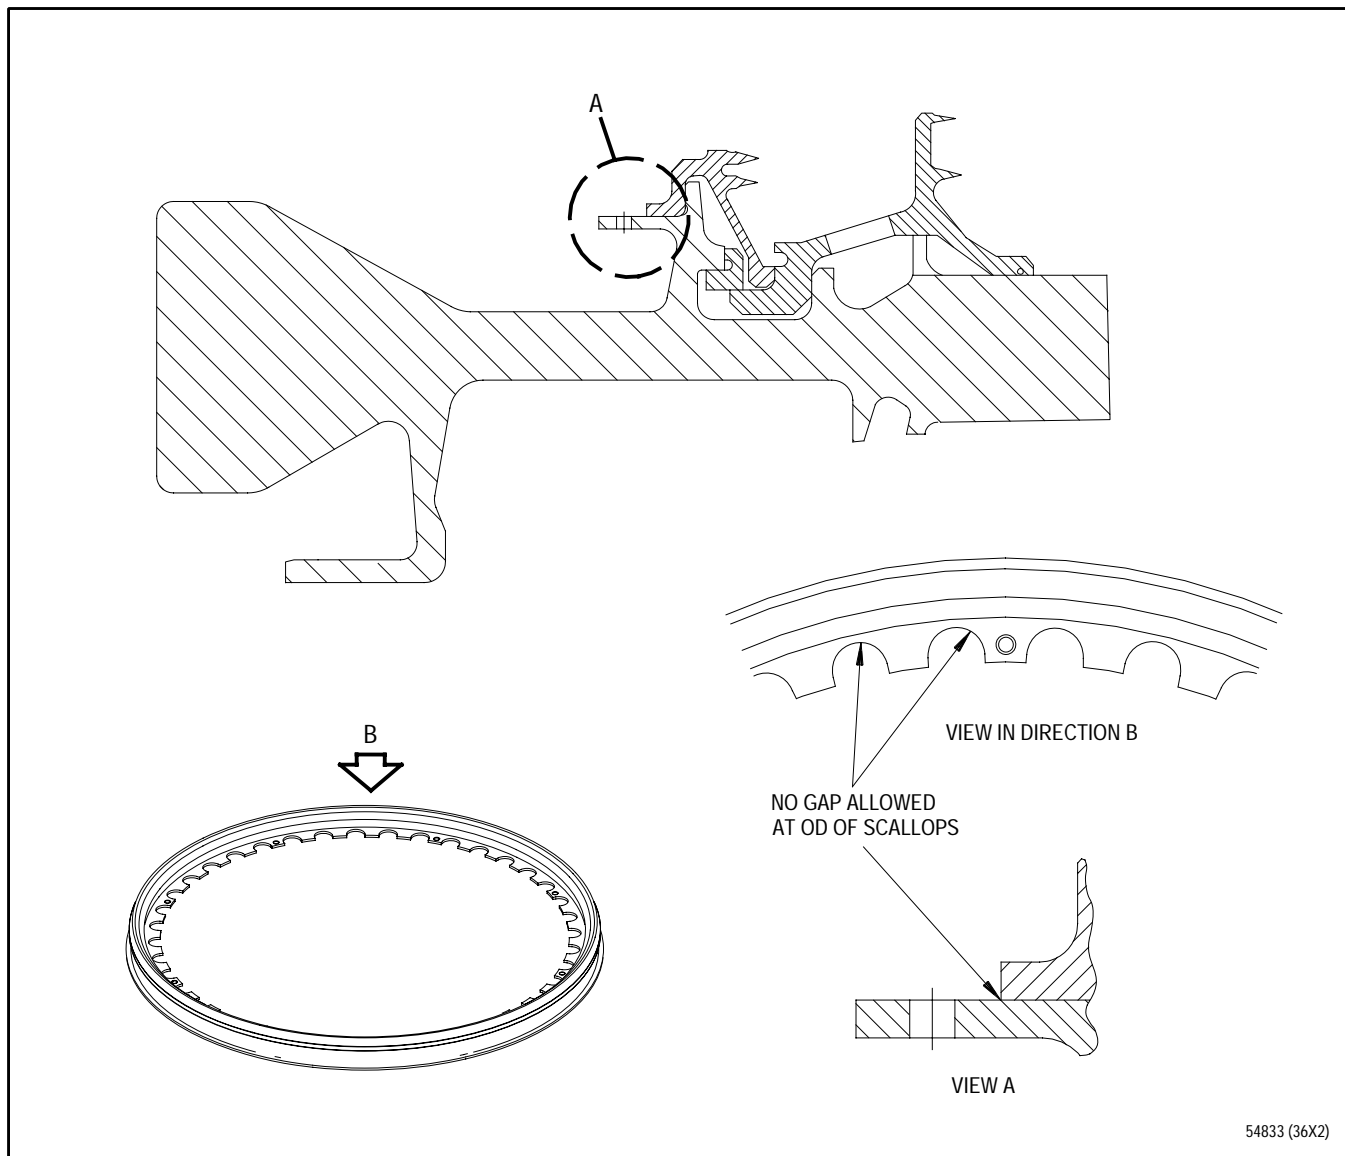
A. Rear Compressor Drive Turbine - Air Seal Seating Check
